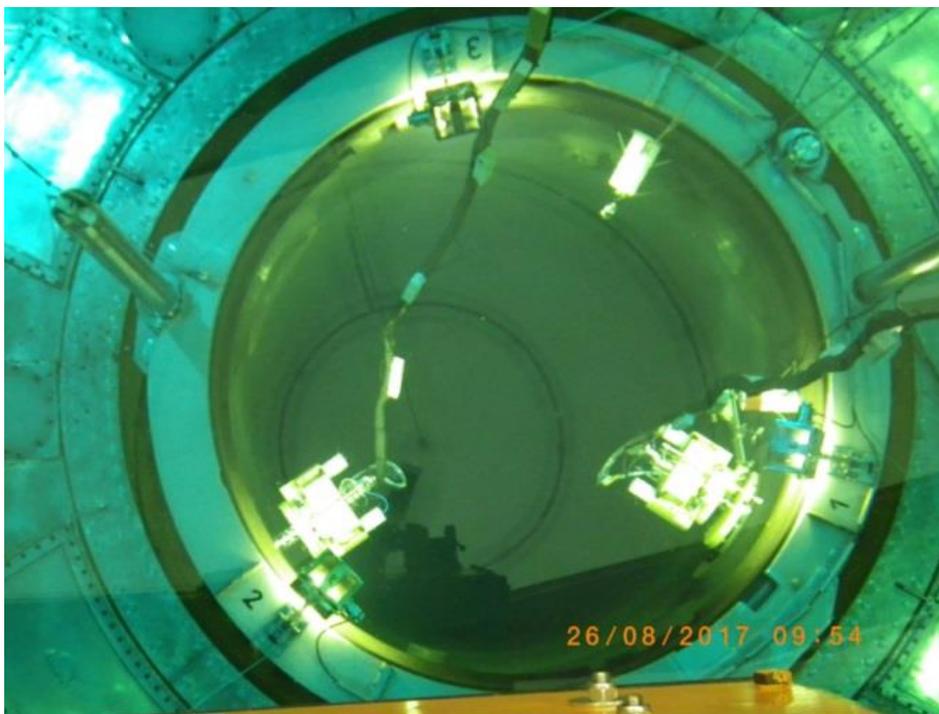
Inspection of Inlet and Outlet Nozzle to Shell welds with two manipulators working in parallel
